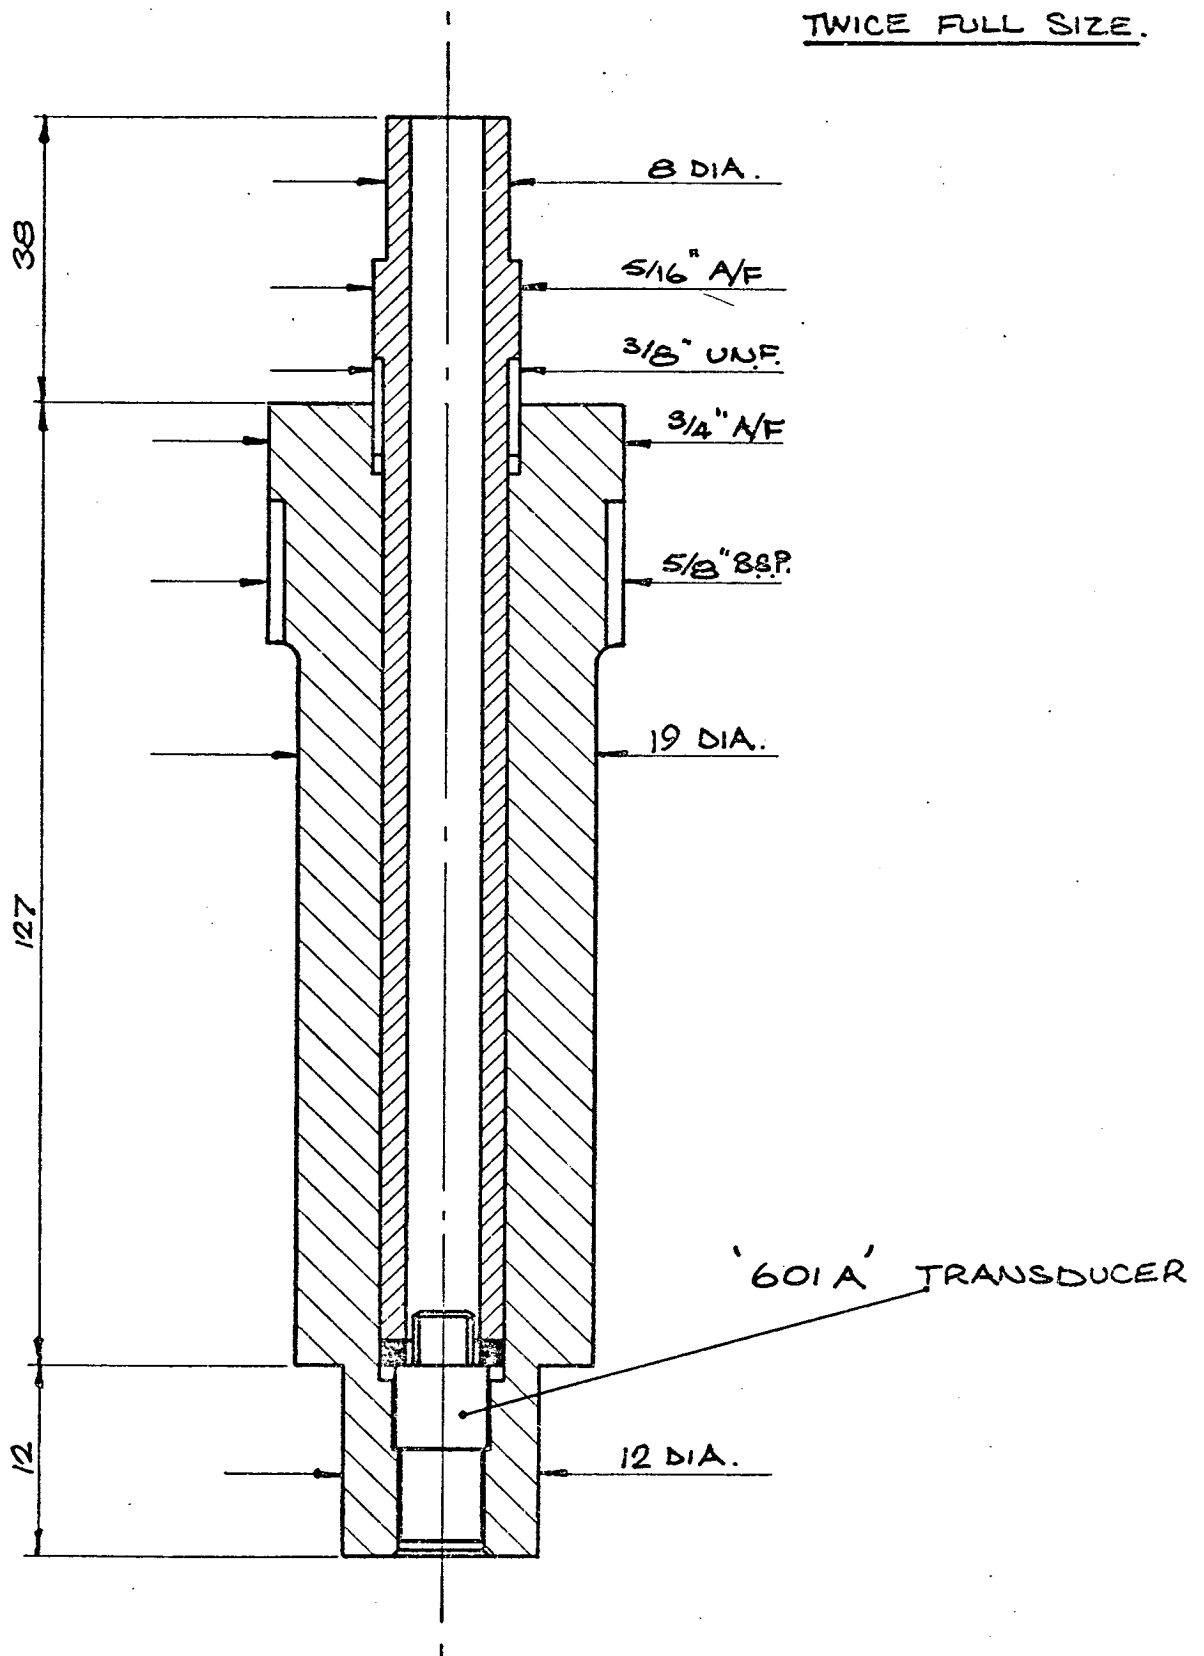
Uncooled cylinder pressure adaptor.
